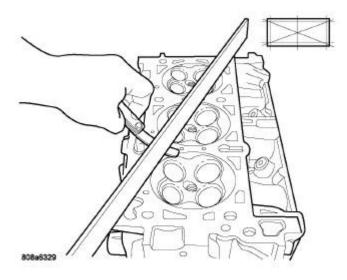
Checking Cylinder Head Flatness-Typical Courtesy of CHRYSLER LLC
